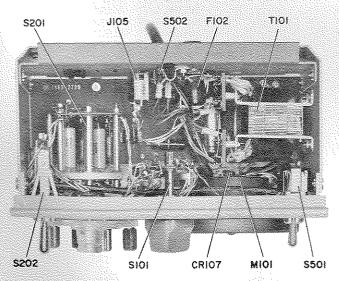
, Bottom interior view of 1863 Megohmmeter.
